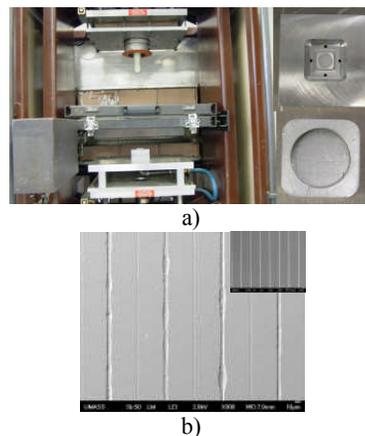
a)thermoforming machine with mold and insert used for transfer, b)conducting polymer transferred to polyurethane sheet.
